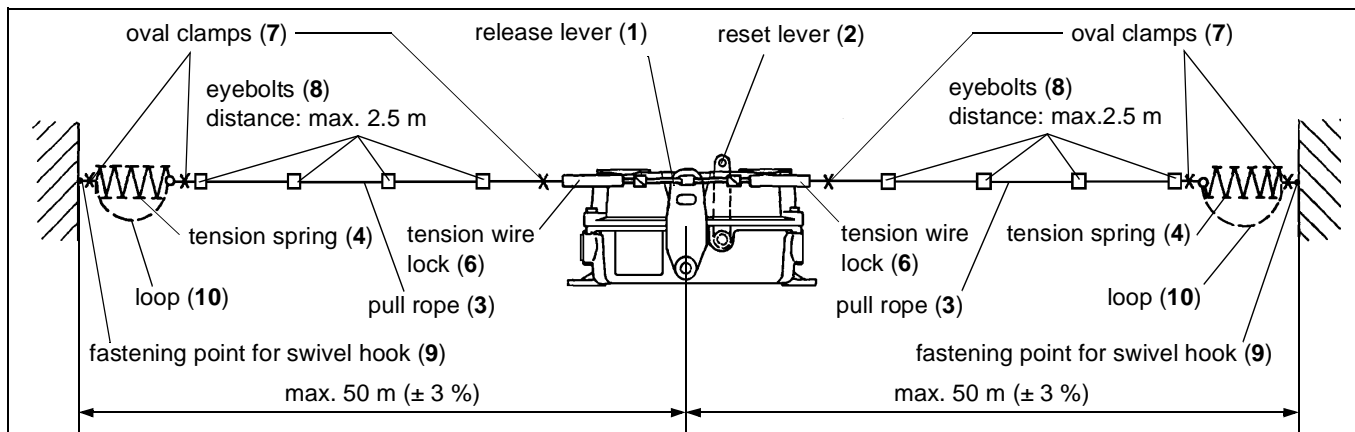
Mounting on the conveyor belt structure an adjusting spring tension
